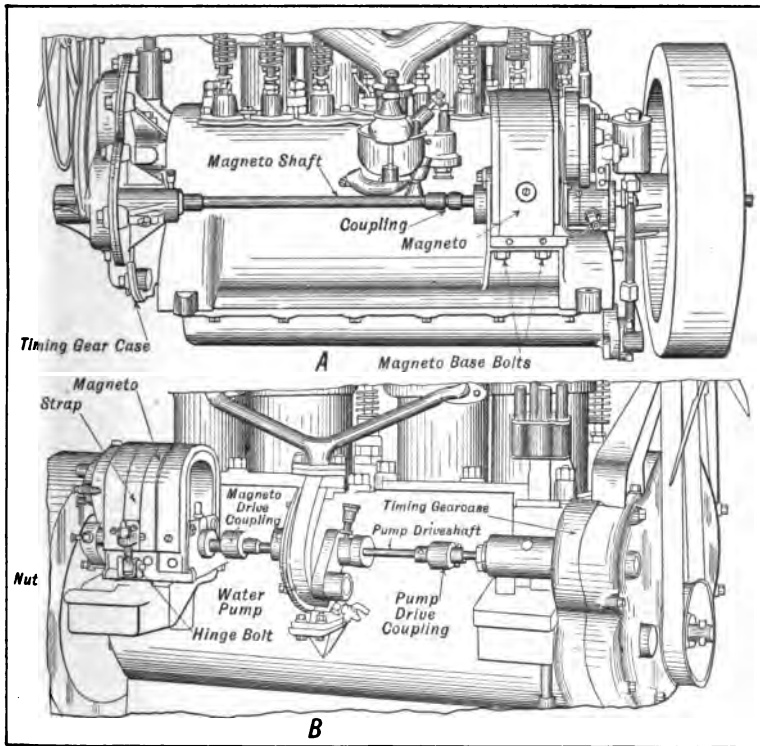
Conventional Methods of Placing and Driving Magnetos. A—System Used on Regal Engines. B—Magneto Driven from Pump Shaft Extension.
